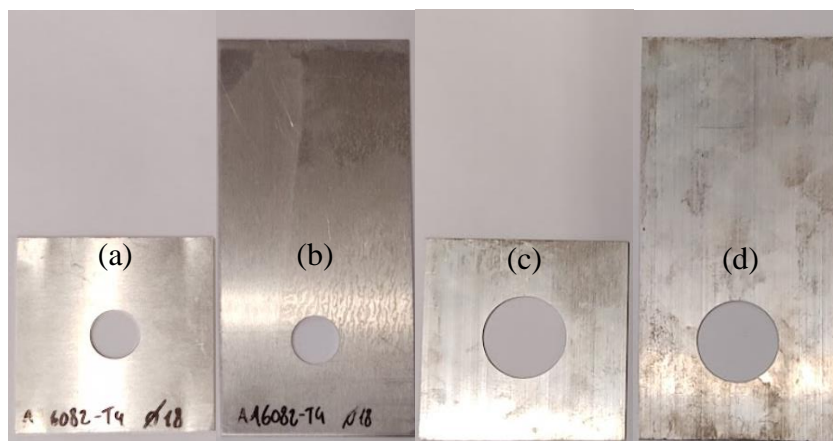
Experimental specimens used in the hole hemming tests: AA6082-T4 (a) joint characterization and (b) single lap shear test specimens, and AZ31 (c) joint characterization and (d) single lap shear test specimens.
